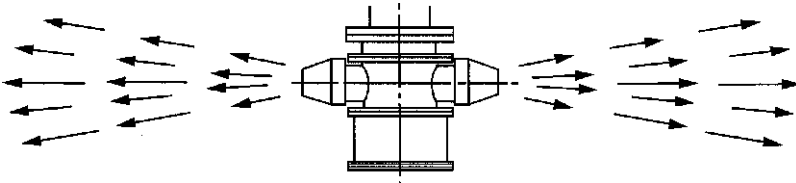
Rotating submerged jet nozzles: P43 machine.
